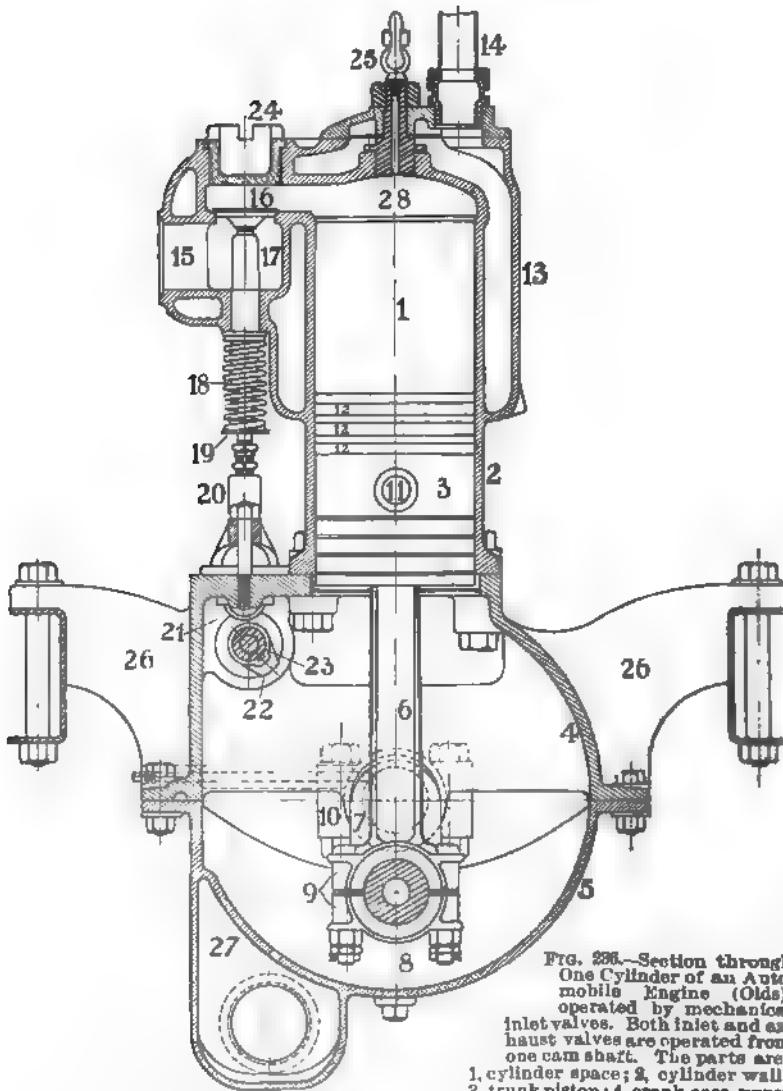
Section through One Cylinder of an Automobile Engine (Olds), operated by mechanical inlet valves. Both inlet and exhaust valves are operated from one cam shaft. The parts are: 1, cylinder space; 2, cylinder wall; 3, trunk piston; 4, crank case, upper half; 5, crank case, lower half; 6, connecting rod; 7, crank shaft braces; 8, crank pin; 9, crank pin bushes; 10, crank shaft bearing; 11, piston pin; 12, 13, 14, piston packing rings; 15, exhaust valve chamber; 16, exhaust valve; 17, exhaust valve outlet; 18, exhaust valve; 19, exhaust valve chamber; 20, valve spring; 21, valve spring retainer; 22, valve push rod guide; 23, exhaust cam roller; 24, exhaust cam; 25, exhaust cam shaft; 26, valve chamber cap; 26, relief cock; 26, 26, engine brackets or hangers; 27, oil circulating chamber; 28, combustion space, or clearance.
